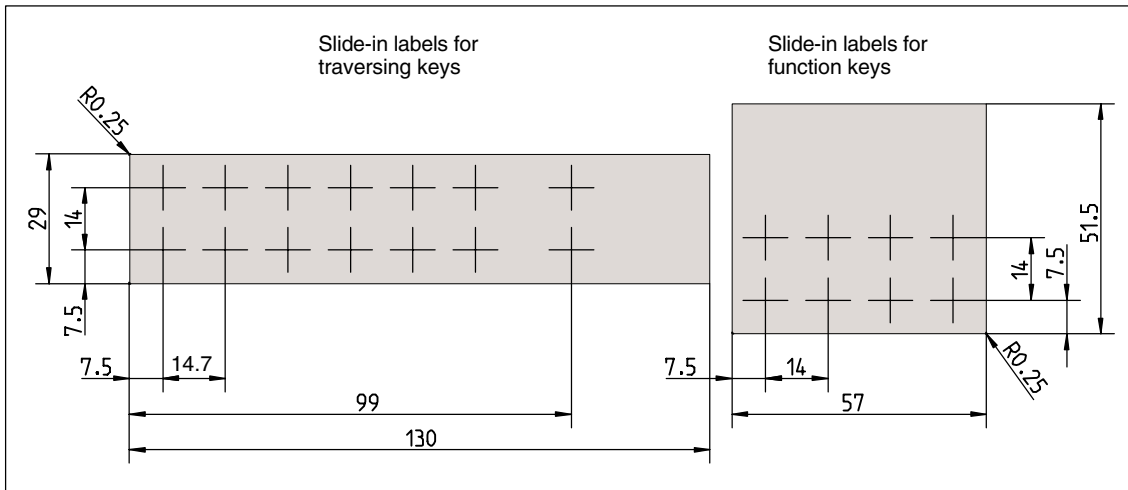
Dimensional drawing for labeling the slide-in labels
